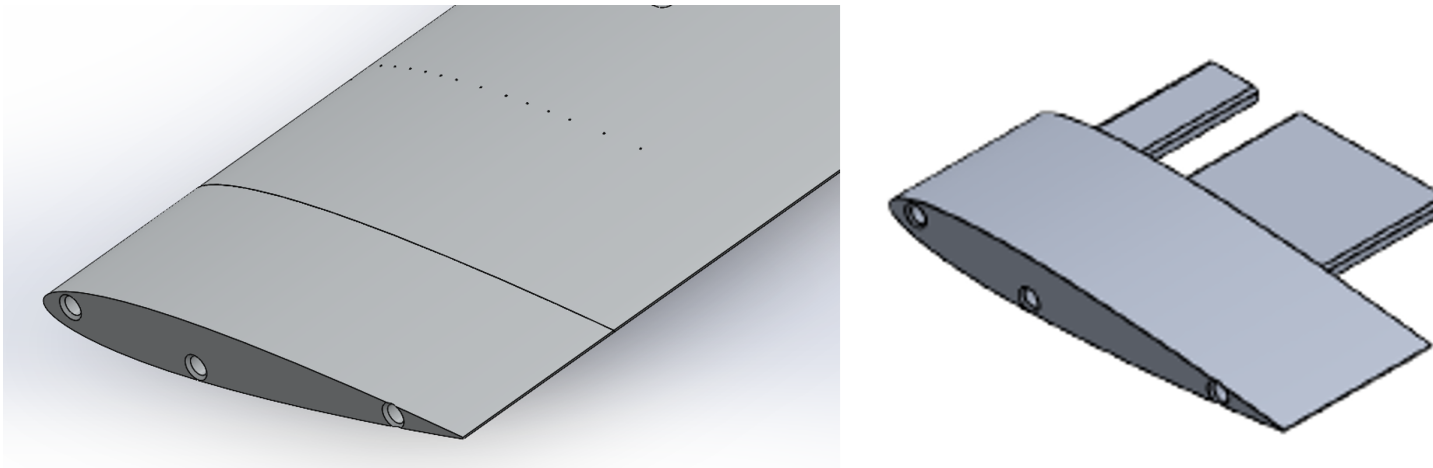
Extension pieces, left) fitted under the foil, right) the extension piece and stainless steel bars showing
